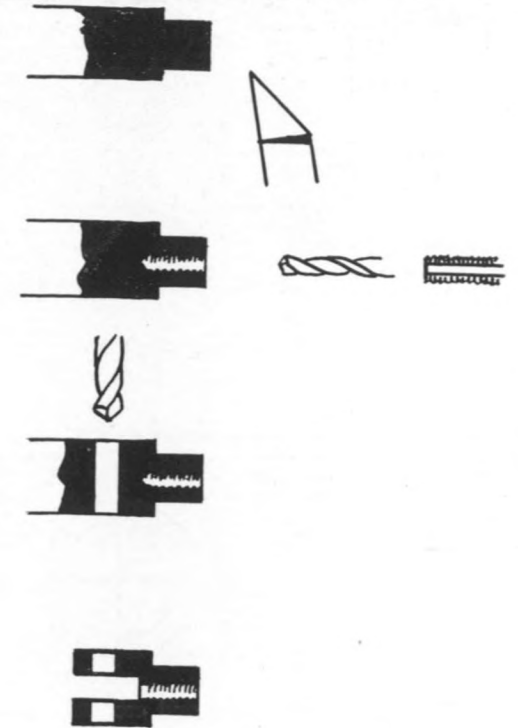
Sequence of operations for making the Valve spindle fork-end.
